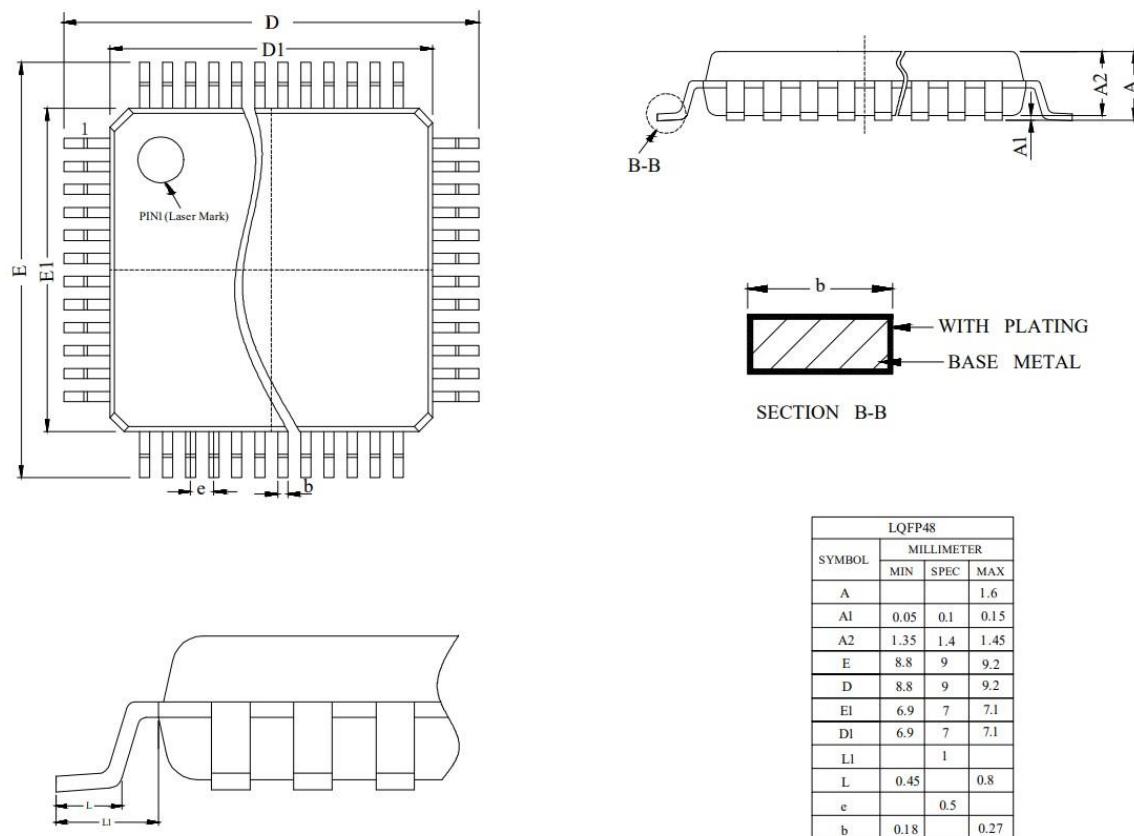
LQFP48_7X7 Package Drawings and Dimensions
